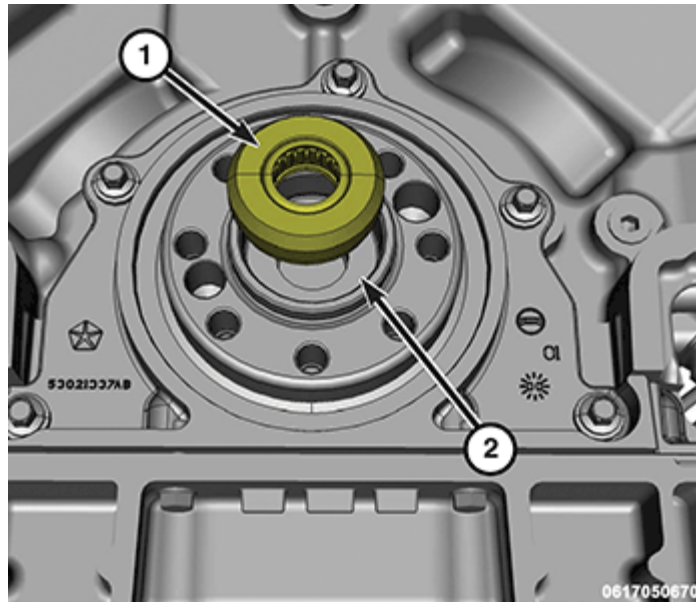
Pilot Bearing Bore & Pilot Bearing
